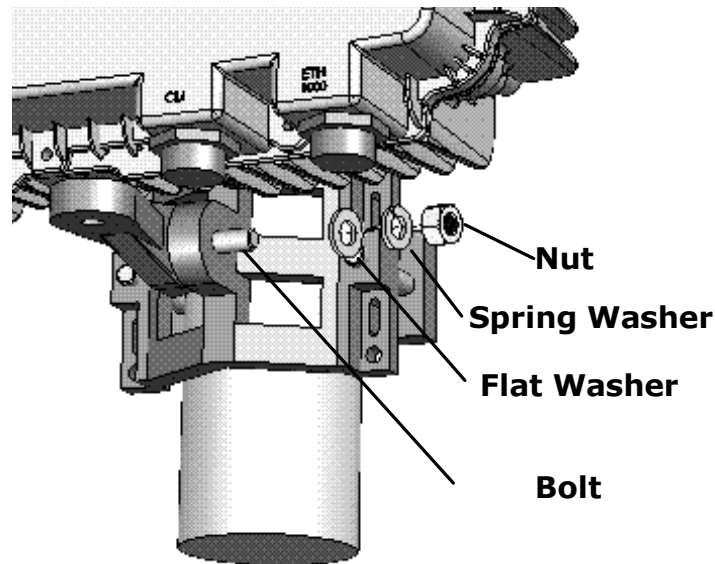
MBW 3100 Unit Vertical Pole Mounting
